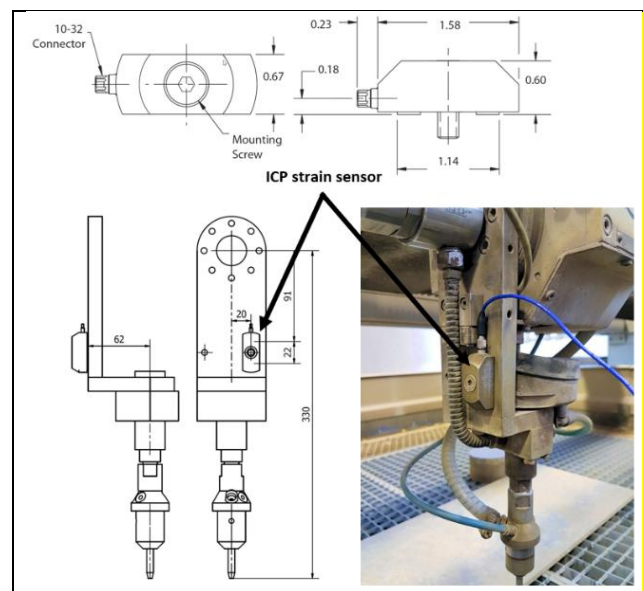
Mounting of the cutter-head collision detection sensor in the supporting structure of the AWJ machine
